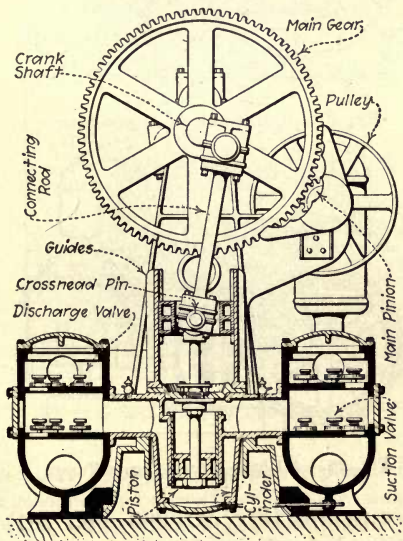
Sectional View Of Double-Acting Triplex Pump.
